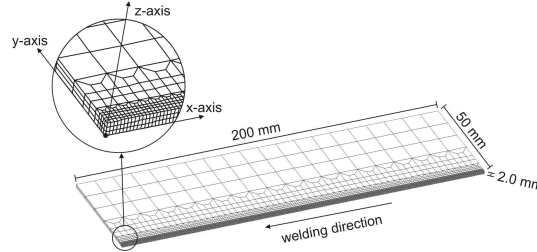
Example of one half of the meshed FE model for the welding simulation of a laser beam bead-on-plate weld on a flat plate, enlarged part shows the mesh in the weld seam area
